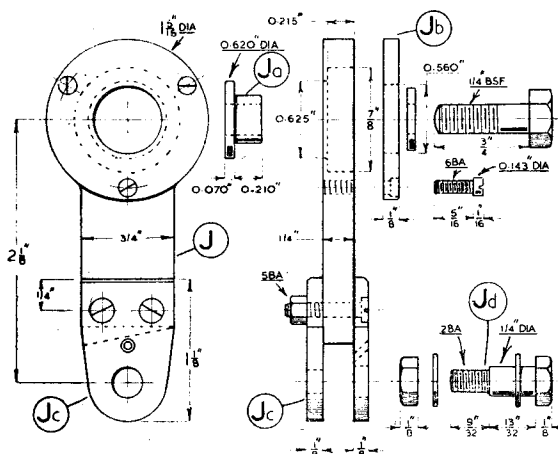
J*—the connecting-rod; *Ja*—the big-end bearing bush; *Jb*—the bearing clamp plate; *Jc*—the little-end fork plates; *Jd*—the little-end pin.
